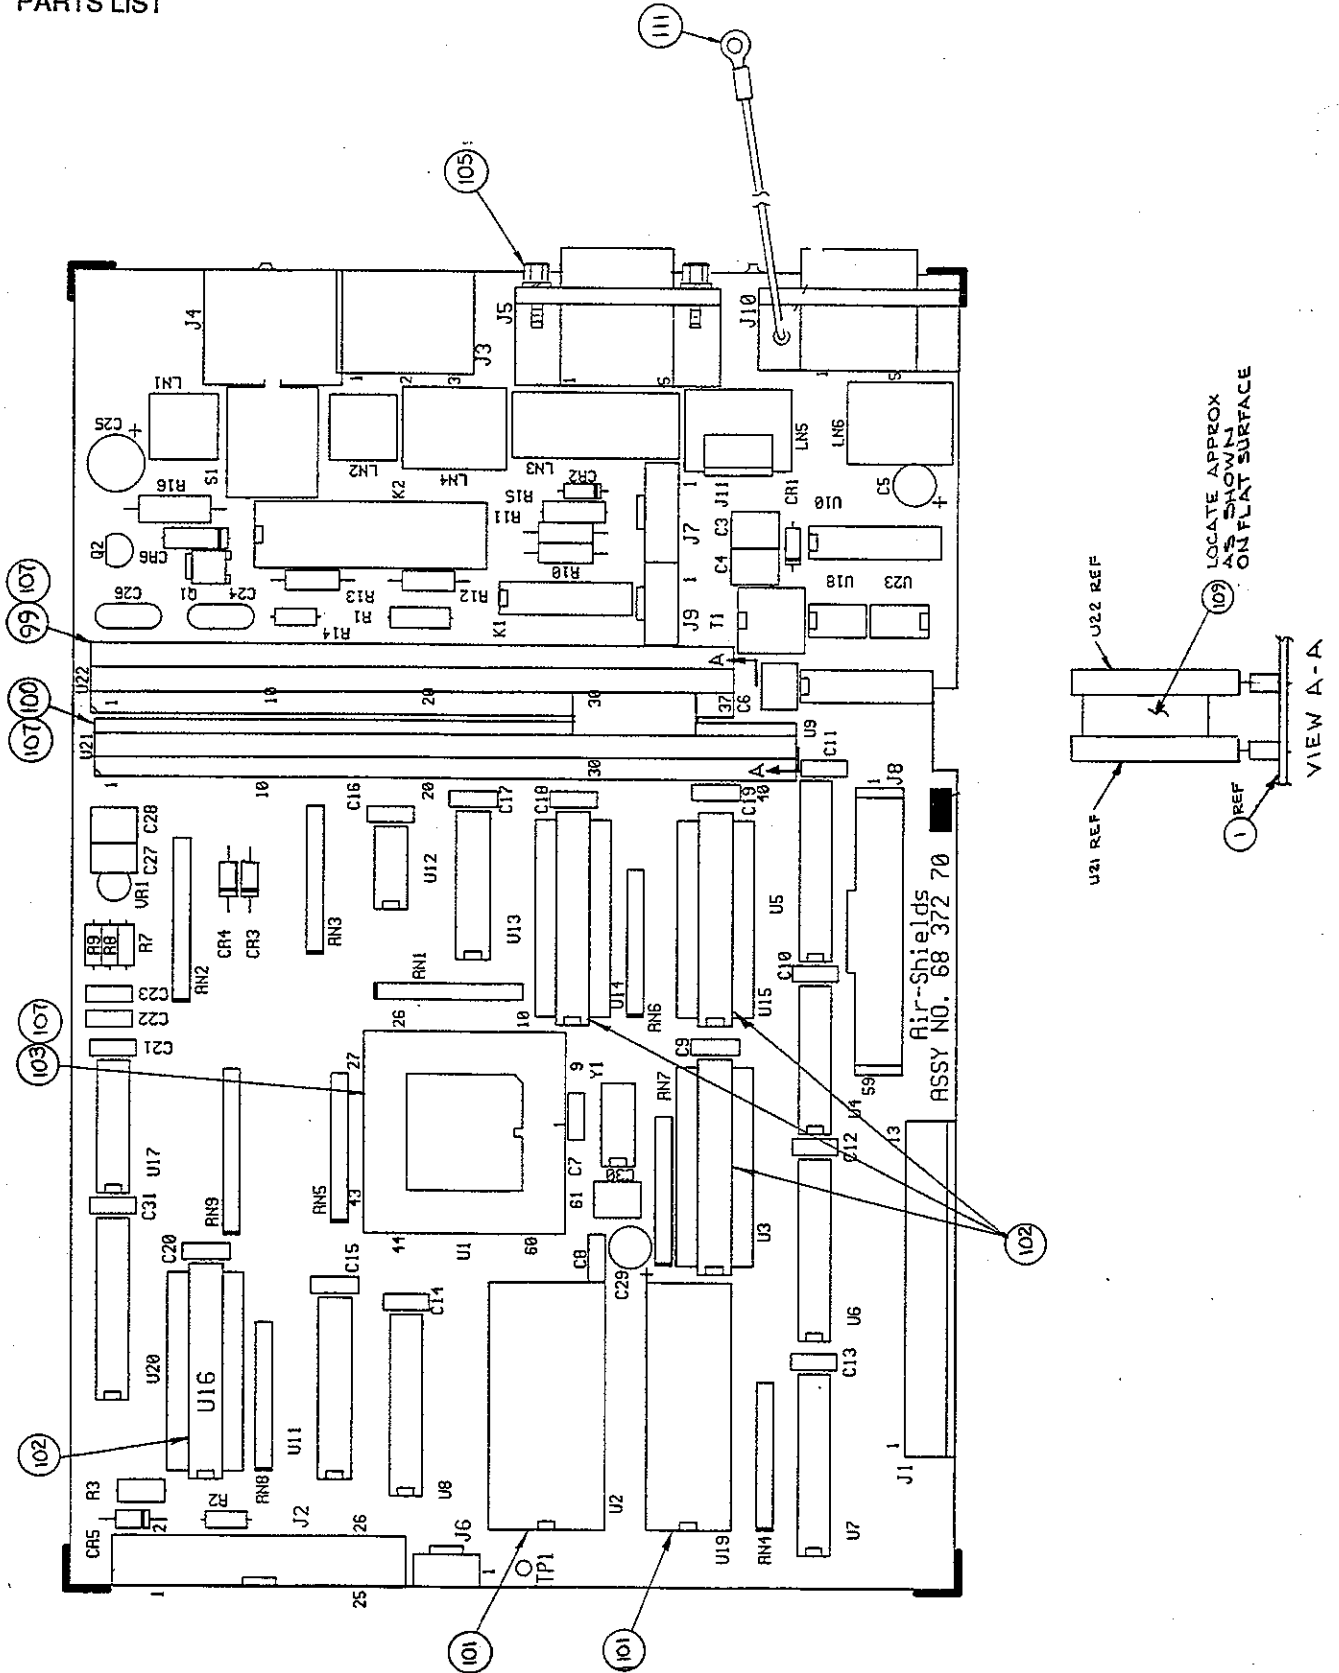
PARTS LOCATION DIAGRAM, MAIN BOARD
